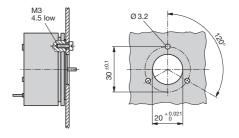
Drilling plan for fixing with 3 cheesehead screws M3.
